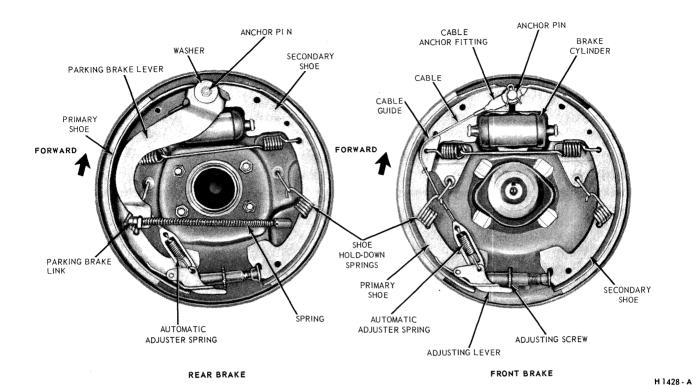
Self Adjusting Brake Assemblies - F-250 Series
